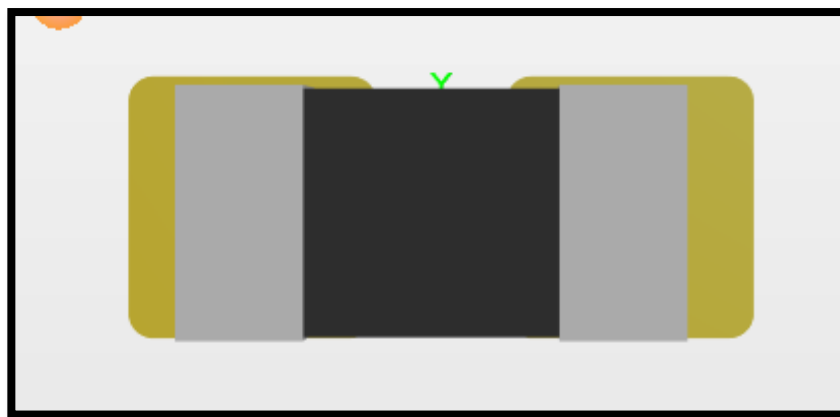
The 3D View of the 0603 Package Resistors in the Library
